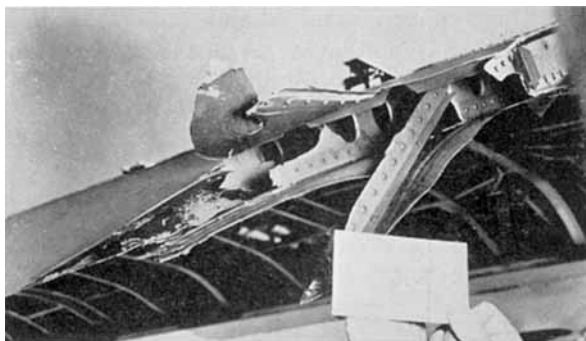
Box beam wing trailing edge—riveted structure—showing fatigue failure in Boeing B-52.
